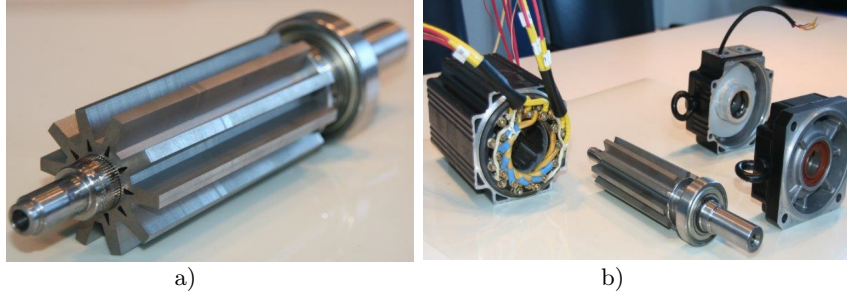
a) Finalized rotor in close-up, and b) completed prototype with housing.
